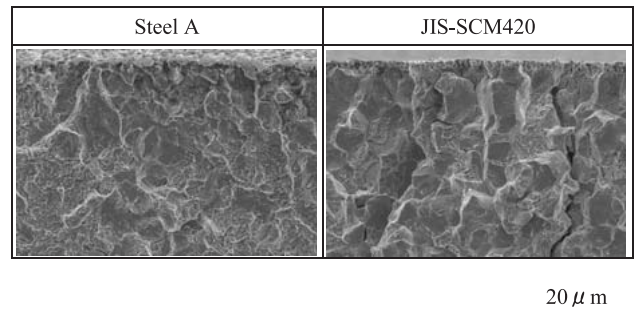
SEM images of fractured surface after Charpy impact specimens.
